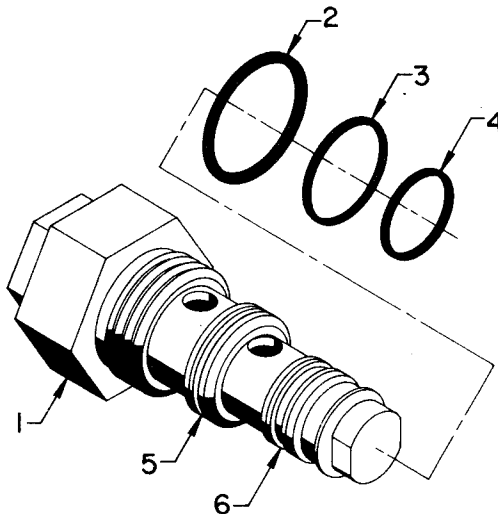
Small Counter Balance Holding Valve (Part Number 73054304)
